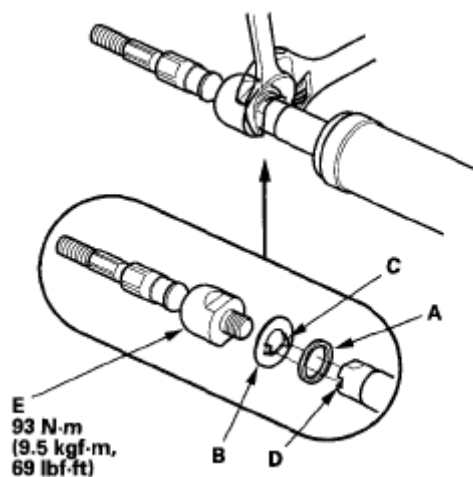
Identifying Rubber Stop (A) And Lock Washer (B) On Rack Shaft (With Torque Specifications)
